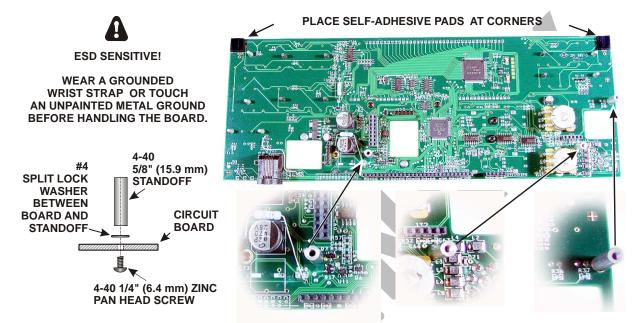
Preparing the Front Panel Board for Mounting, Part 1.
